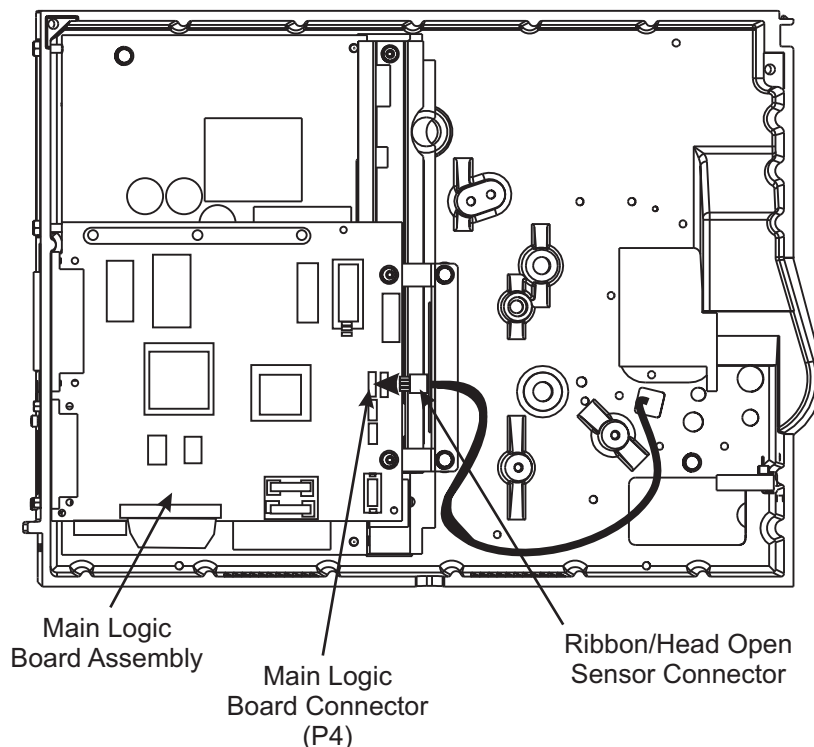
Ribbon/Head Open Connection to Main Logic Board
